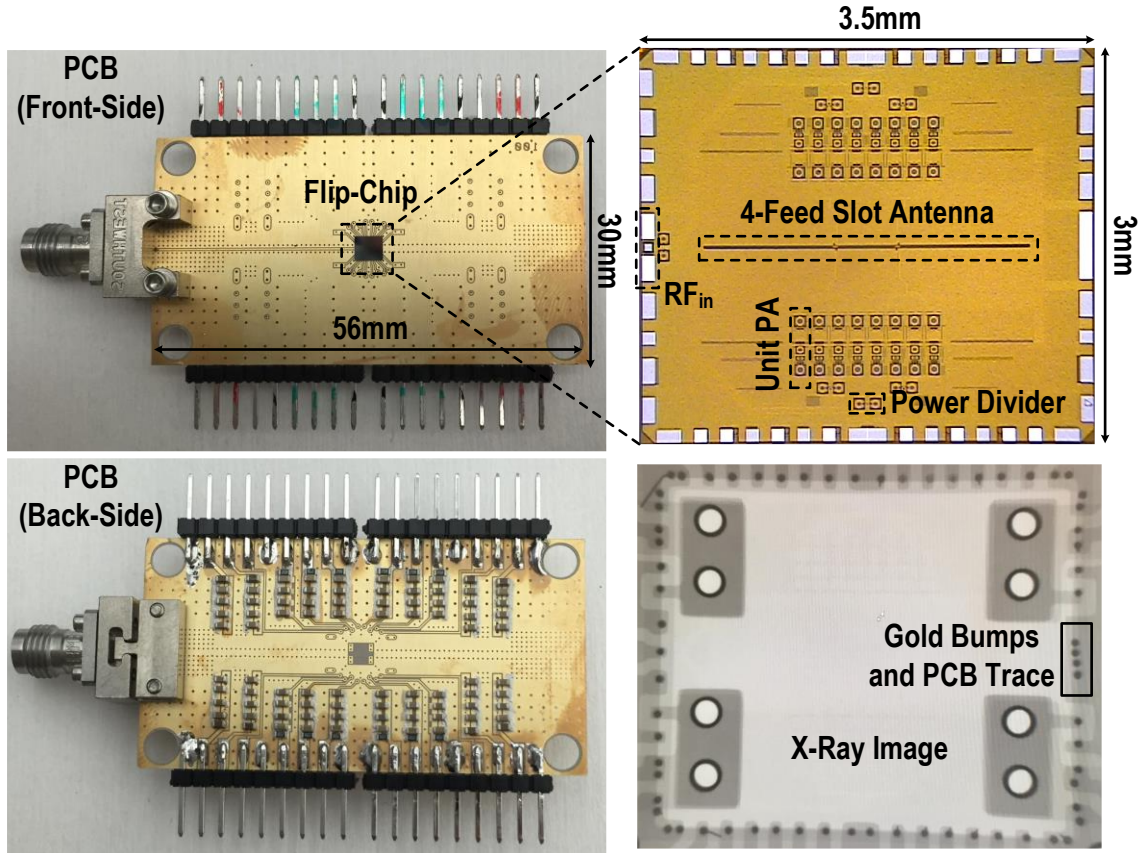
Pictures of the flip-chip packaged PCB, chip microphotograph, and an X-ray image to verify the alignment between the flip-chip bumps and the PCB traces.
